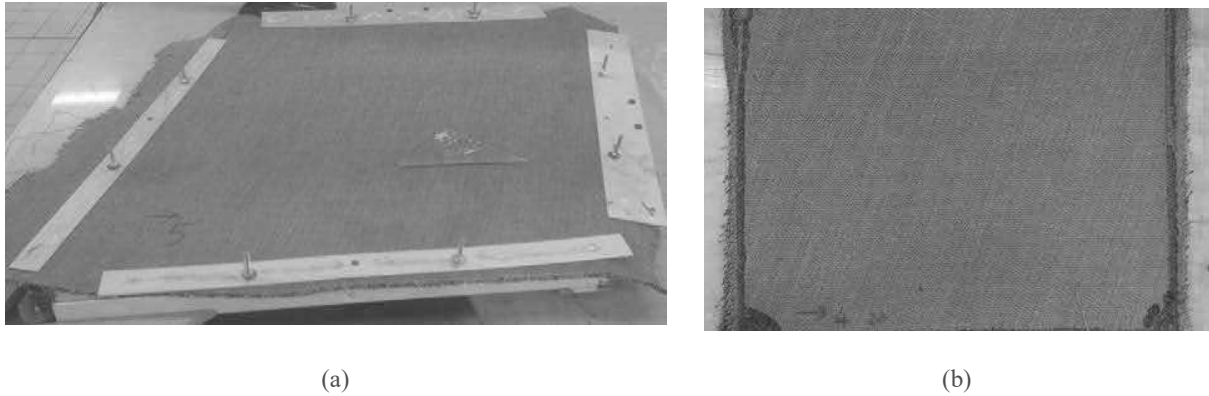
Commingled fabric (specified Tab. 1) (a) during the shearing step and (b) before consolidation at 20° shear angle with an ultrasonic welding line on the edges.
